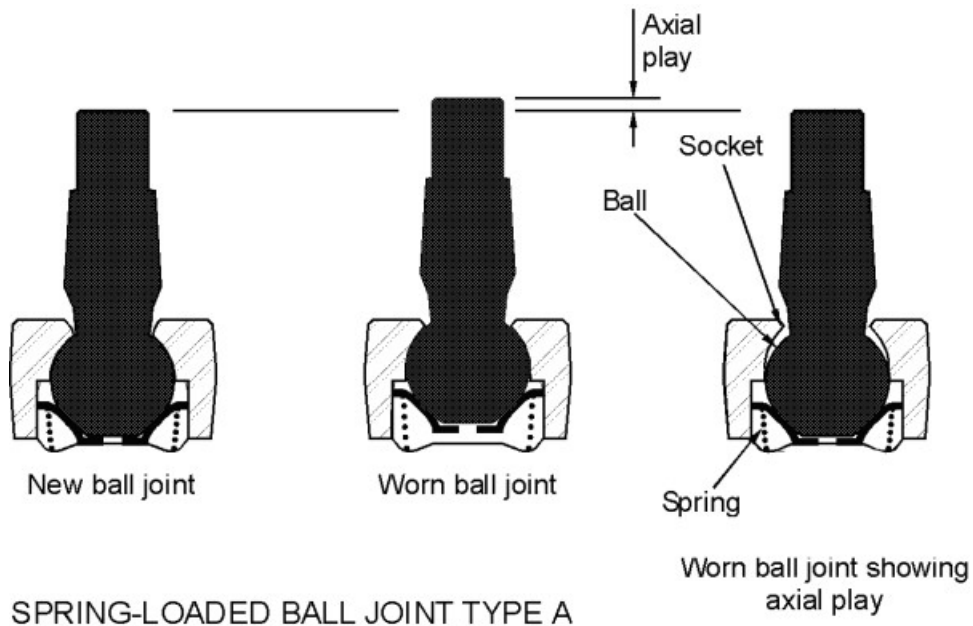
Examples of wear in spring-loaded ball joints
